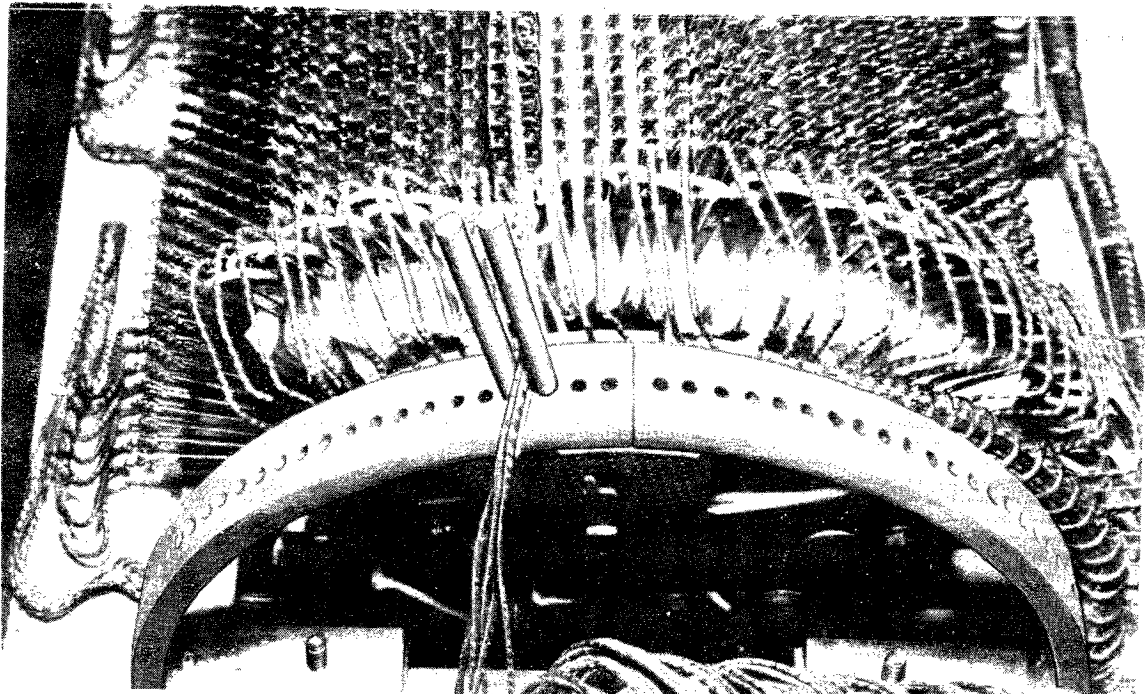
MOTOR UNISELECTOR FORMING JIG - NOTE USE OF PINS FOR ARC FORMING.
